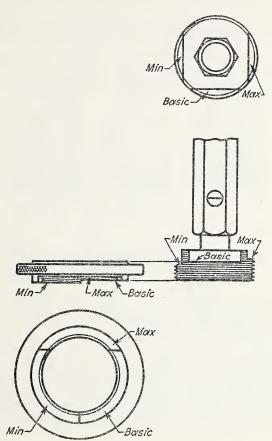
Alternative form of taper pipe thread plug and ring gages, limit type.
